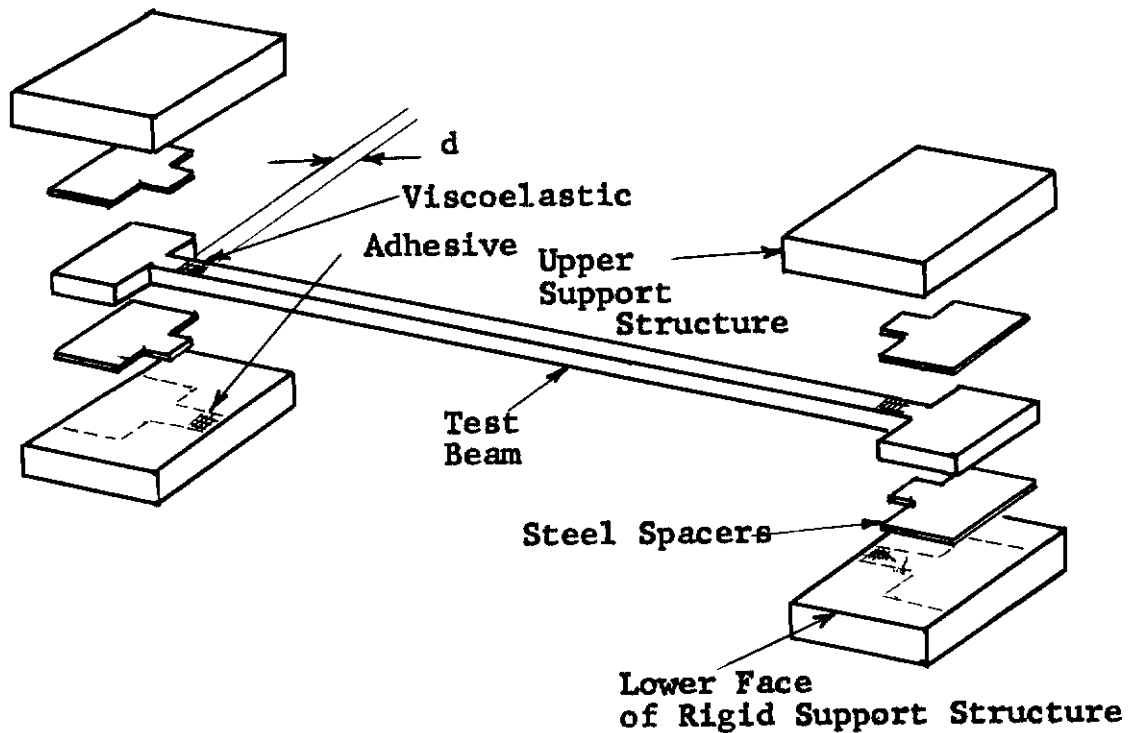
Exploded View of Set-Up for Flexural Deformation Mechanism
